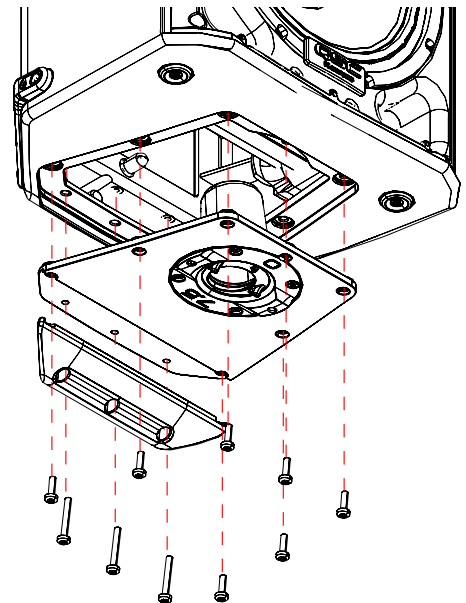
To remove the pole cup assembly, you must locate the nuts on the interior of the enclosure
